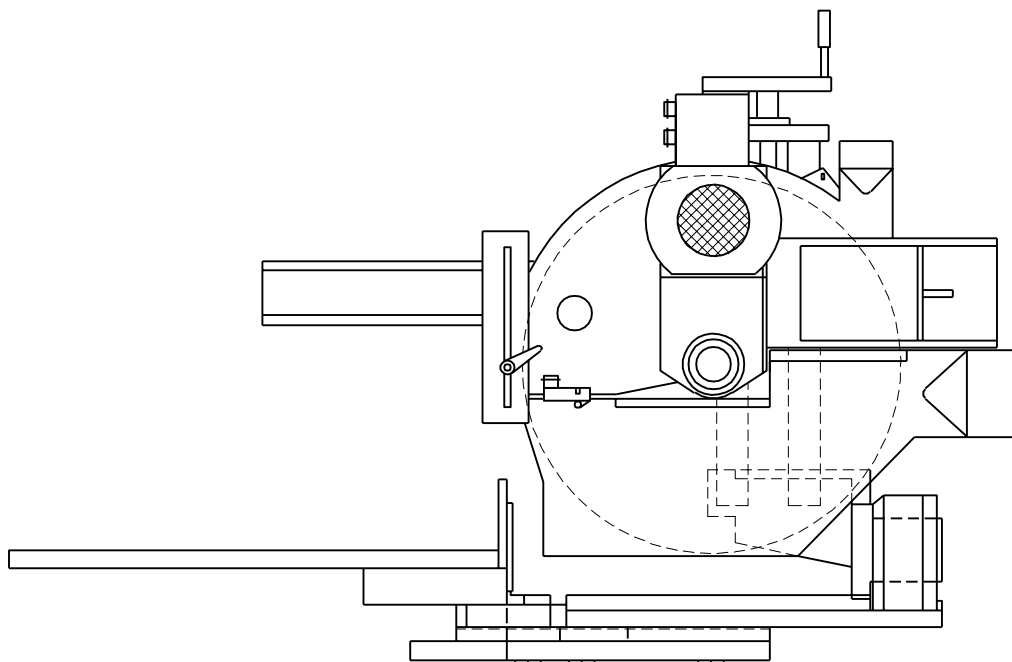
Example 2 of a manual horizontal cutting cross-cut circular sawing machine with one saw unit (manual radial arm saw)
